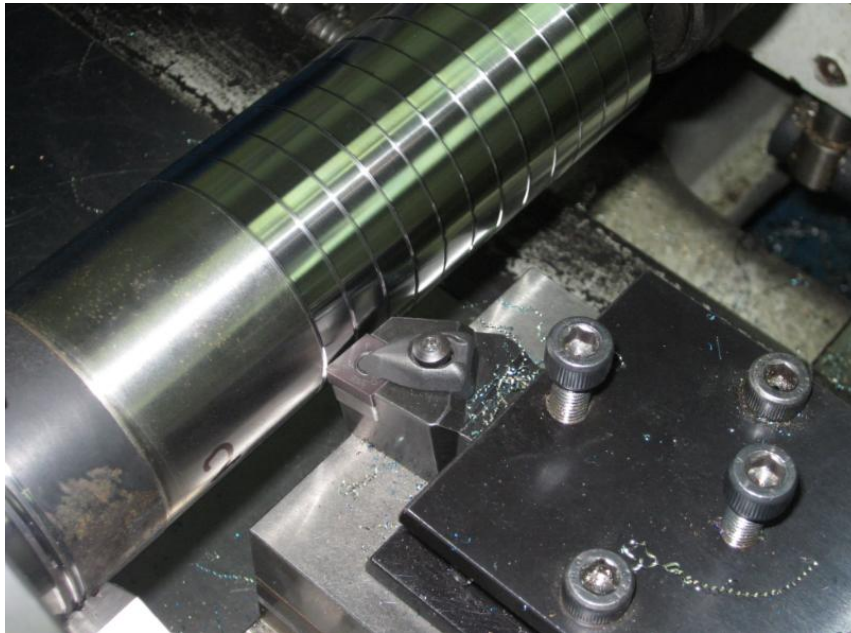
Researche on the dry cutting of tempered cold work tool steel with WNT borazon insert. [fot. Jakub Siwiec, Department of Manufacturing Tehnology, Cracow University of Technology]
